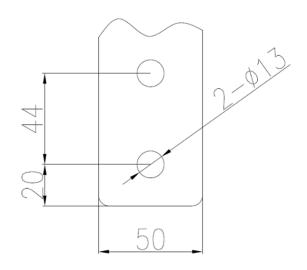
Diameter of Copper Bar for DC Wiring (mm)
